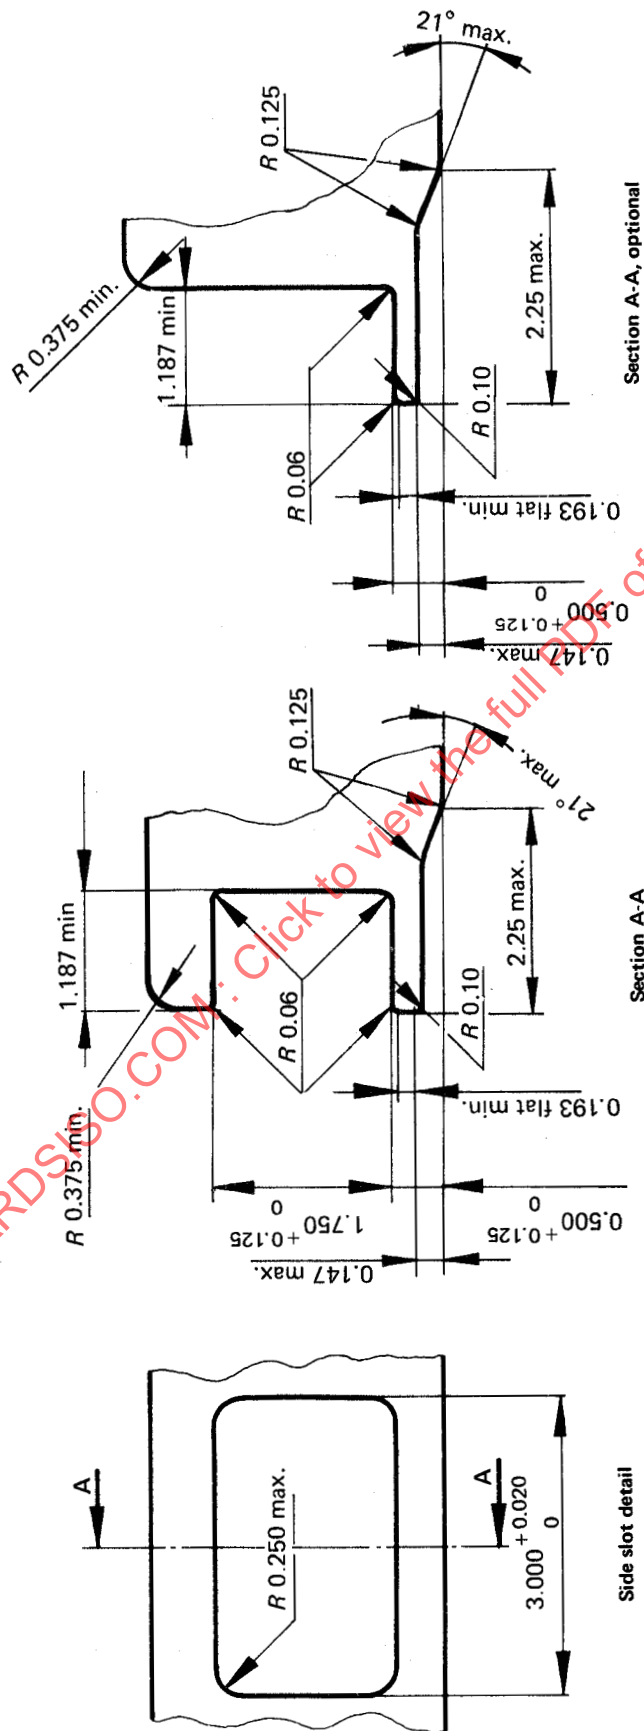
A — Side slot detail, recessed edge option, Type A pallet — Dimensions in inches
